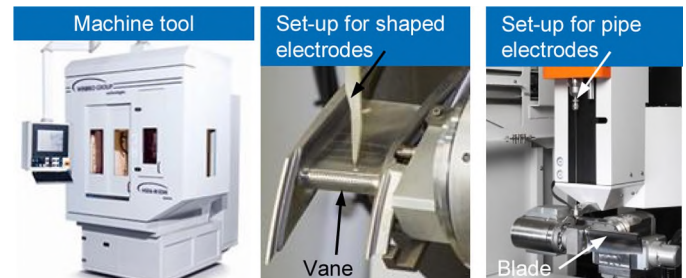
High speed EDM system and machine set-up for EDM drilling of blades and vanes, (courtesy of Winbro Group, GF Machine Solutions).
